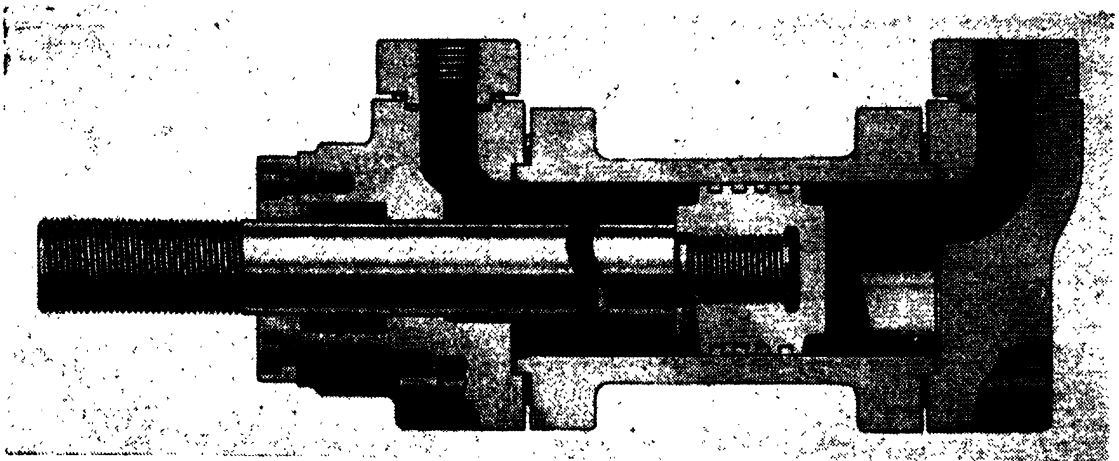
Double-acting cylinder. (*The Oilgear Co., Milwaukee, Wis.*)
